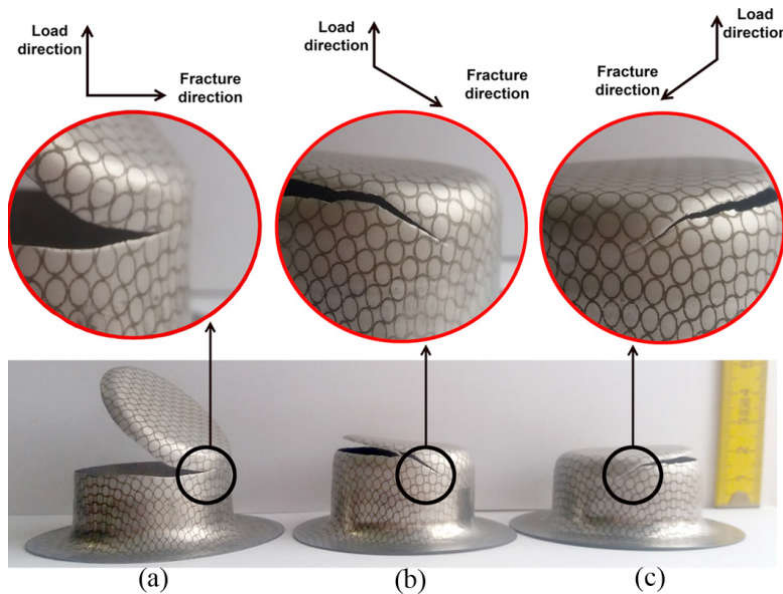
Fracture direction with punch speed of (a) 30 mm/min⁻¹, optimum BHF and initial blank with a diameter of 80 mm, (b) 3 mm/min⁻¹, high BHF and initial blank with a diameter of 80 mm, (c) 3 mm/min⁻¹, optimum BHF and initial blank with a diameter of 82 mm
